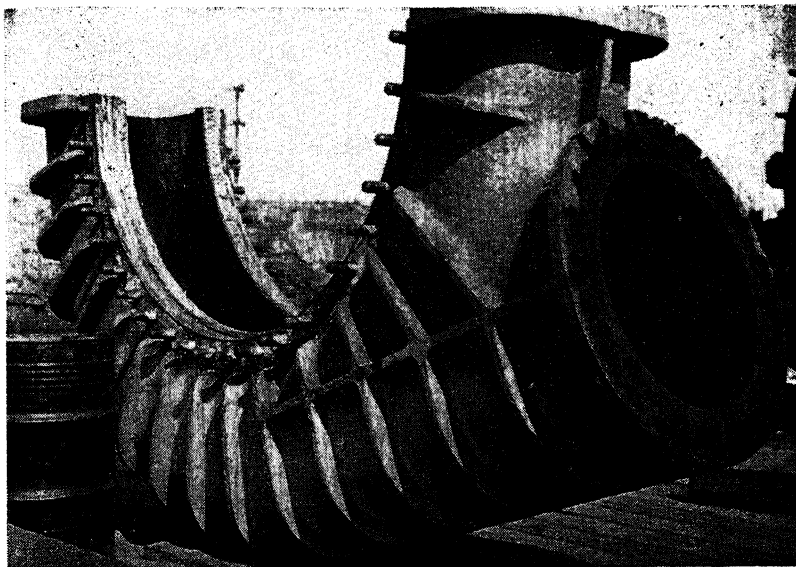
Half of a dredge pump casing. Worn cavities are built up with mild steel electrode and hard-surfaced with tool steel electrodes.
